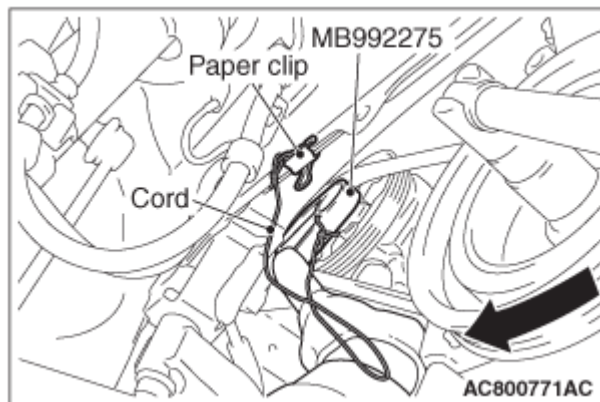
Setting Special Tool MB992275 And Power Steering Oil Pump Drive Belt In Oil Pump Assembly Pulley
